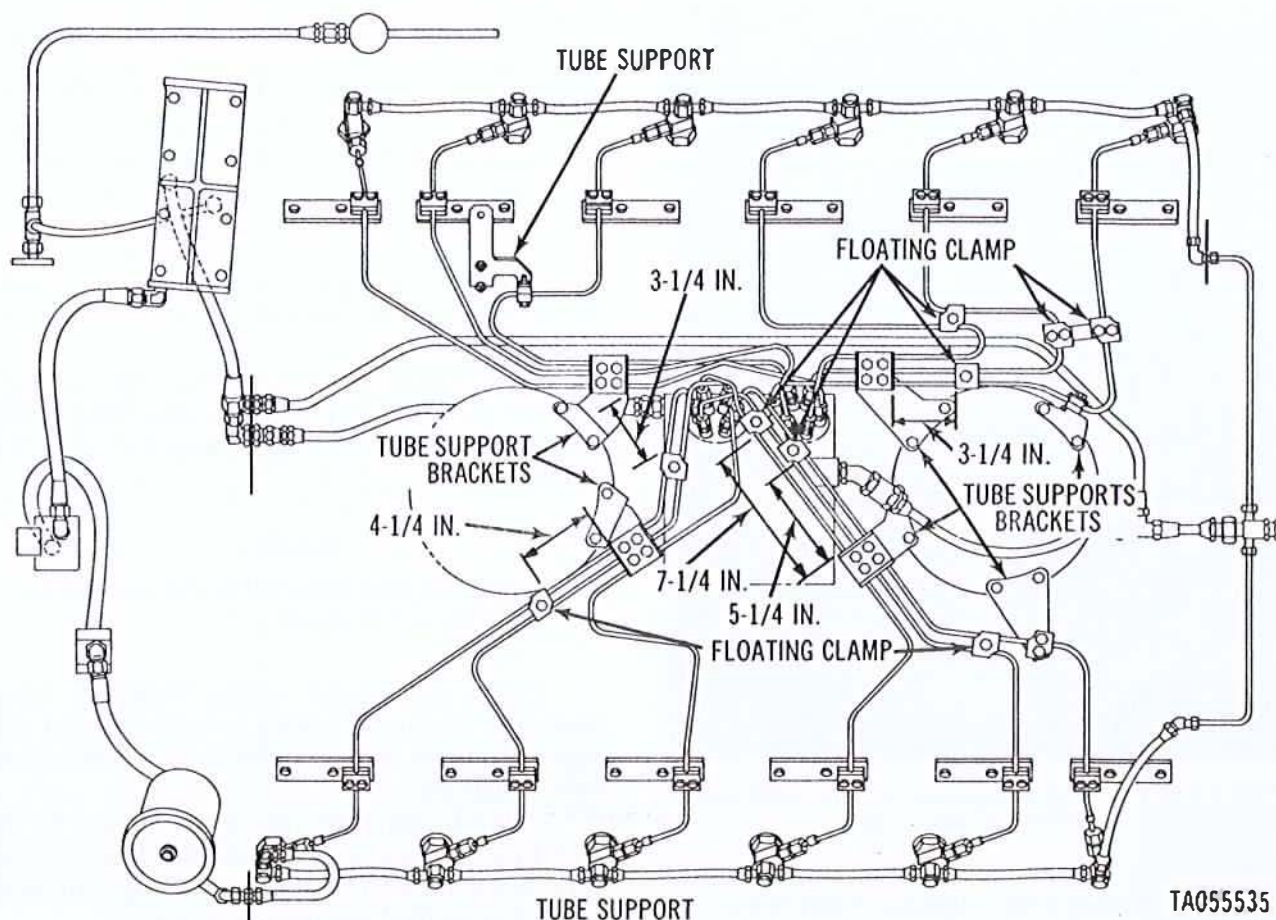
Location of fuel injector tube clamps, model AVDS-1790-2DR engine.
